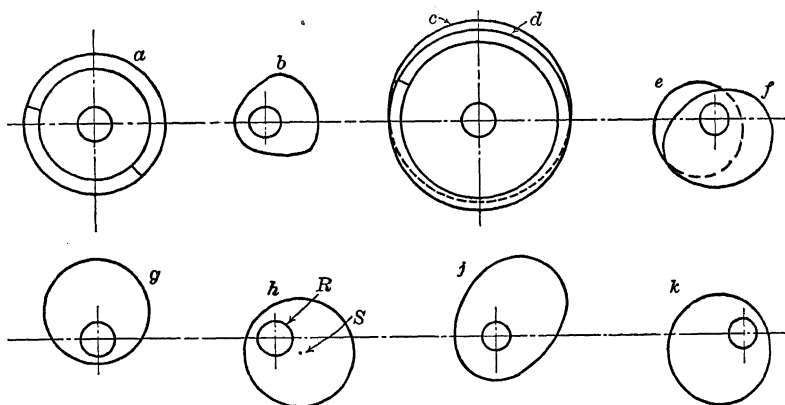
SEPARATE END VIEWS OF CAMS SHOWN IN FIG. 180, TO REDUCED SCALE
